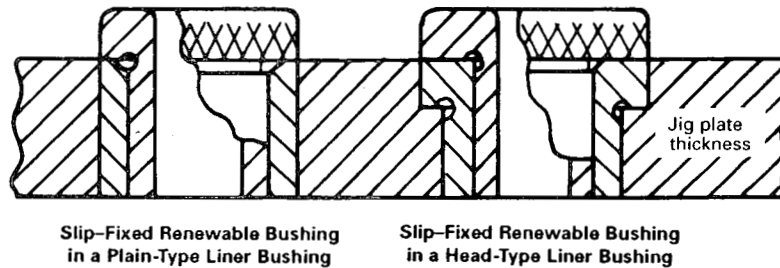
RENEWABLE BUSHINGS AND LINER BUSHINGS
